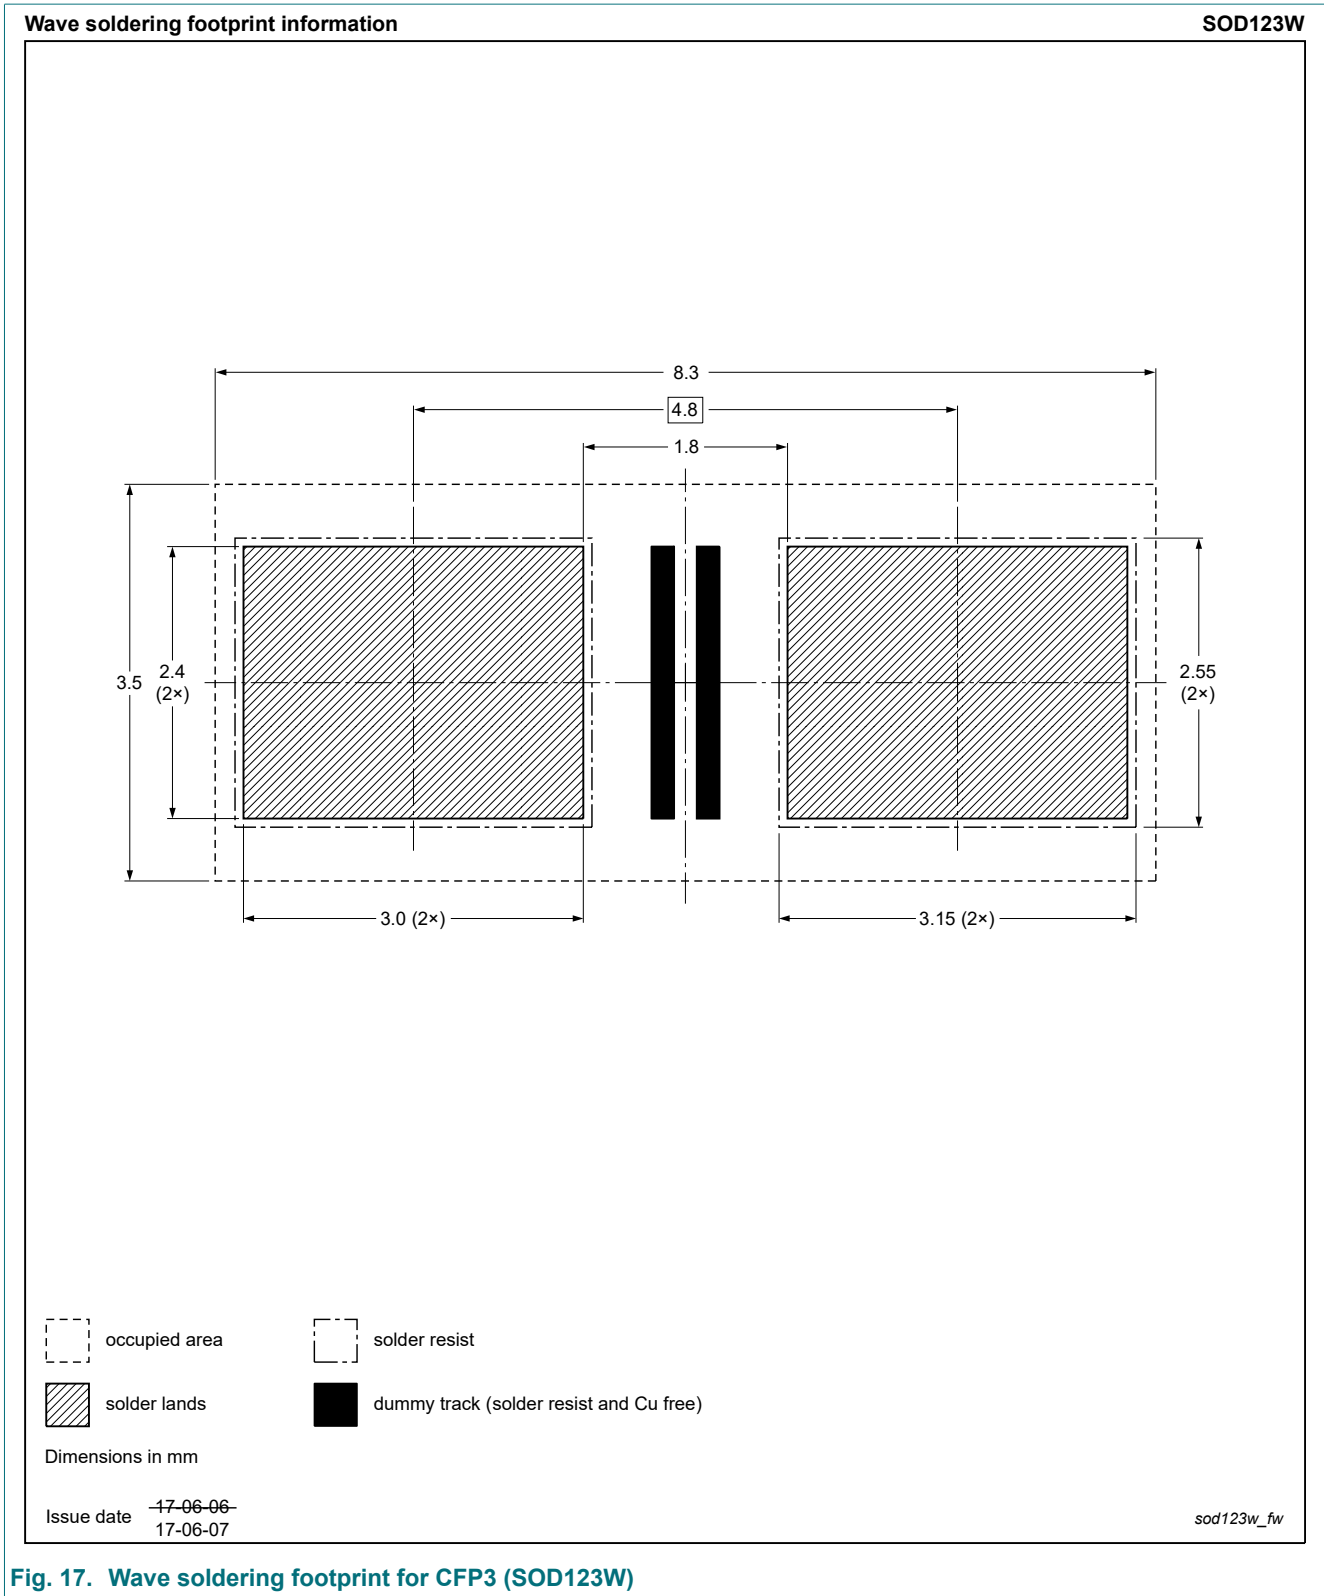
Wave soldering footprint for CFP3 (SOD123W)
